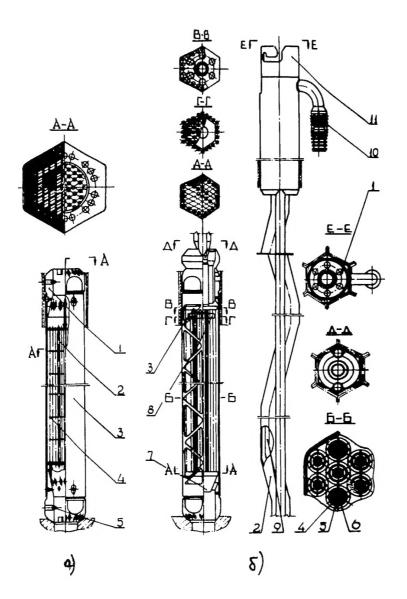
GENERAL VIEW OF THE BOILING ZONE FUEL ASSEMBLY AND SUPERHEATING STEAM CHANNEL
